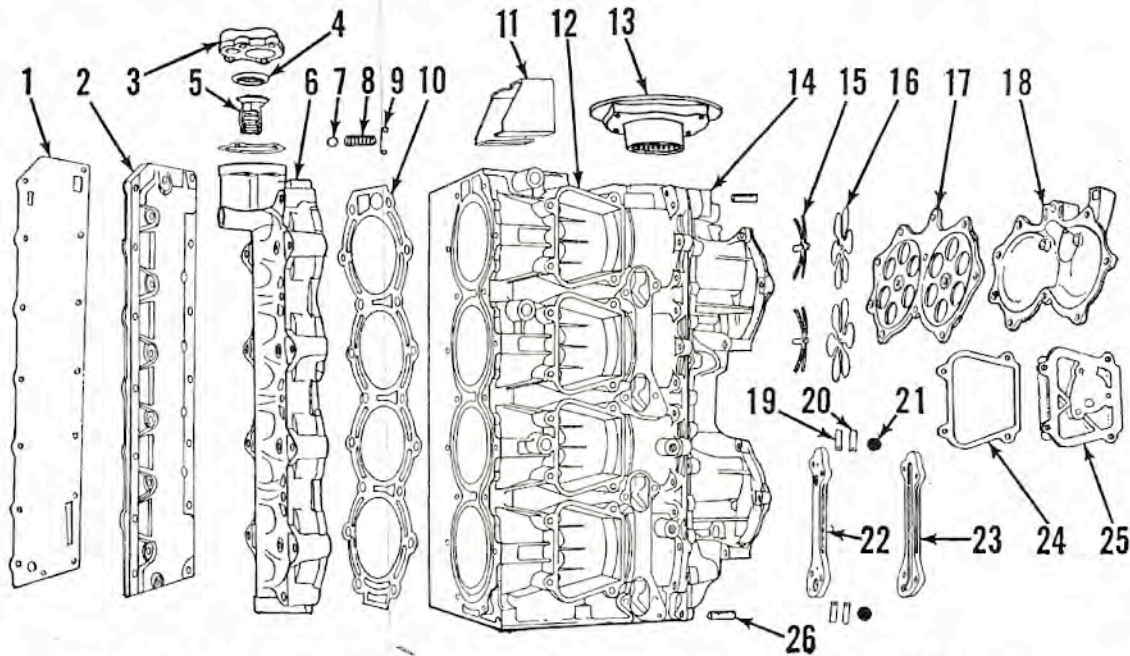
Exploded view of powerhead cylinder, crankcase and associated parts used on Tiger Shark models.
